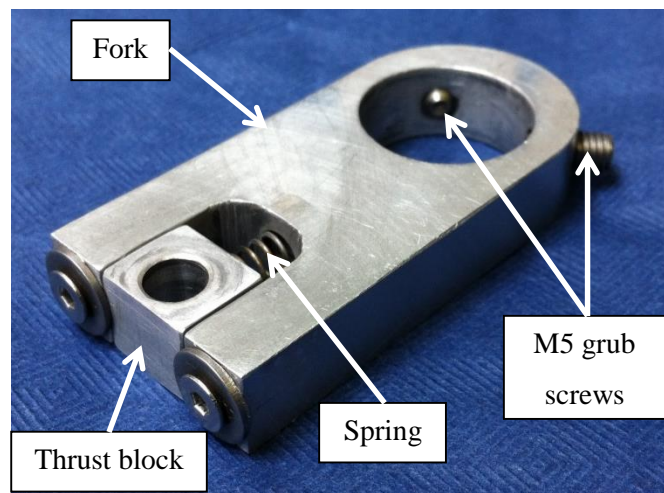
Photograph of aluminium fork, spring and thrust block
